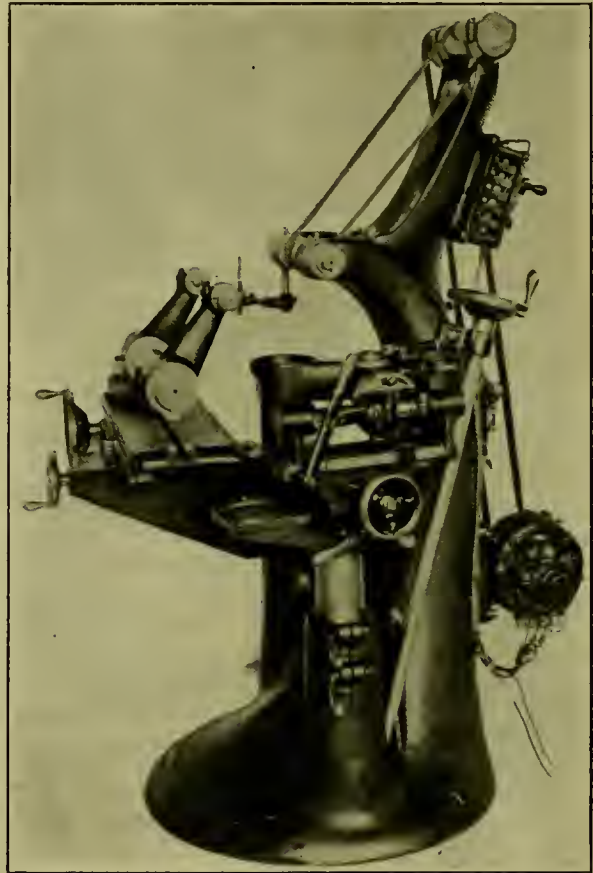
SHOWING THE MACHINE ARRANGED FOR MOTOR DRIVING.
